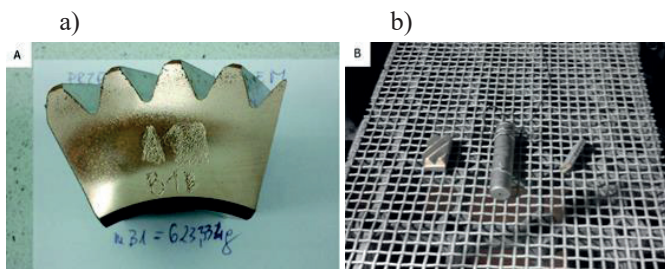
AISI 9310 steel specimen, a) free view, b) mounted in the chamber of the furnace
